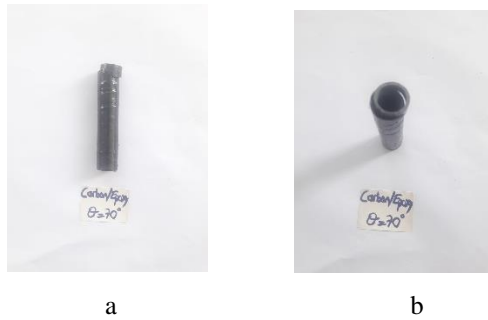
Damage formation of carbon/epoxy specimen under axial compression load; a) front view, b) top view
